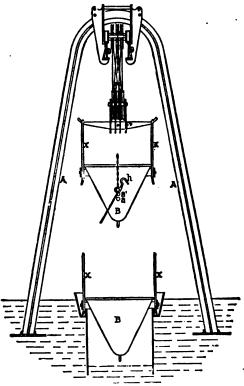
Matte Settling Pots Used at Omaha and Grant Works, Denver, Colo.; Cross-section.
